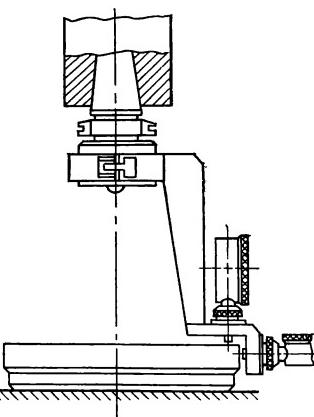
Instrument for measuring linear and angular displacements of the spindle of a jig borer that are due to thermal deformation
